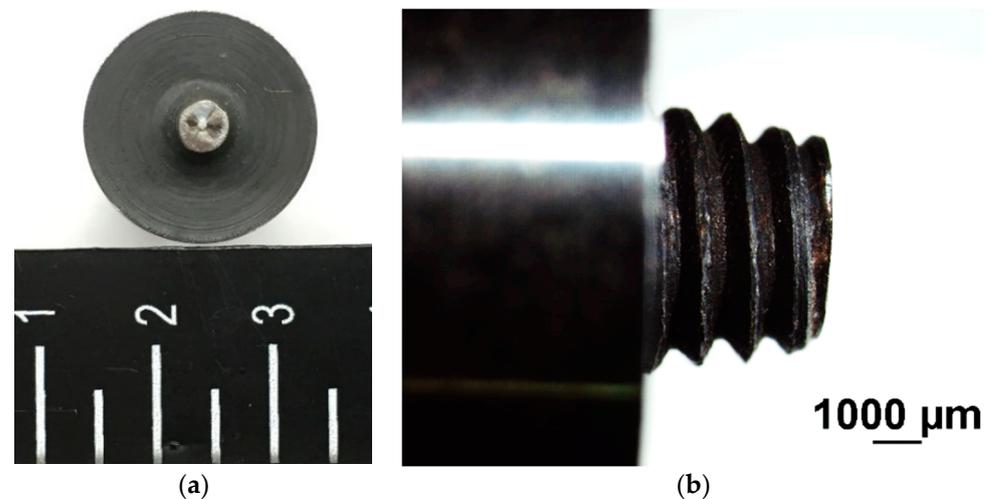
Tool 1 design: (a) shoulder and (b) pin.
